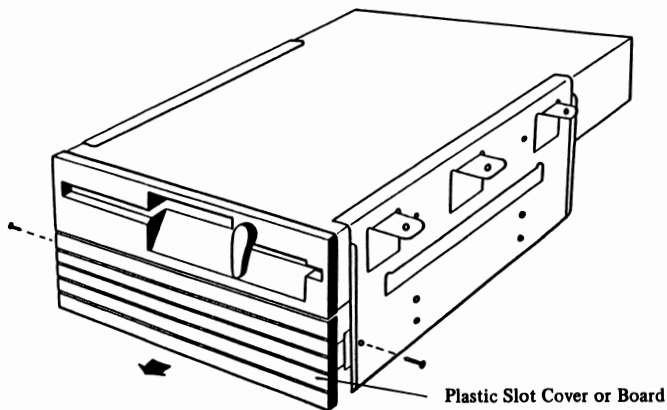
Removing the plastic board from the Empty Lower Bunk
